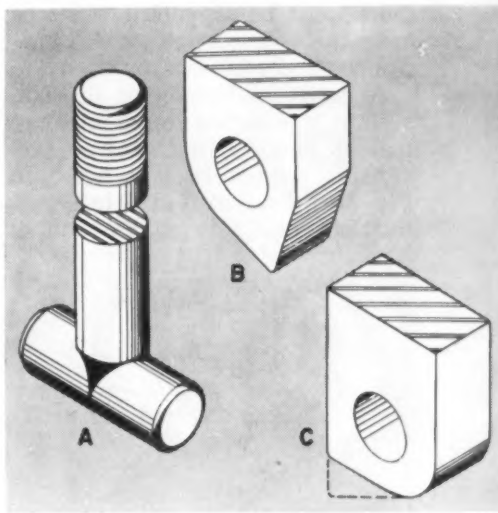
(A) Two-piece swinging bolt in which lower part acts as pivot pin; (B) lower part of swinging bolt with integral stop; and (C) drawing showing how squared side on swinging bolt can be extended to act as a stop.
